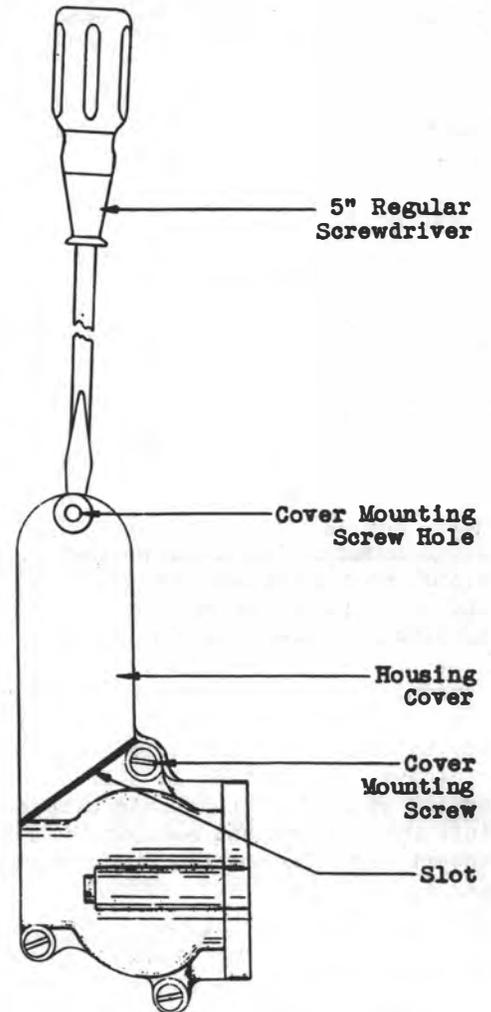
A - Illustrating Splitting of Alarm Housing Cover
